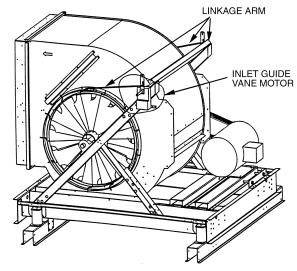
B — Inlet Guide Vane Motor (Sizes 075-105)
